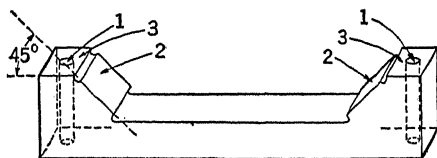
Corner reflector for Line *E*. (1) Clearance holes for bolts which hold reflector to end plate. (2) Chromium-plated reflector surfaces, flat to 0.0001 in. (3) Aligning surface. Plane 2 must be accurately at 45° with plane 3.
